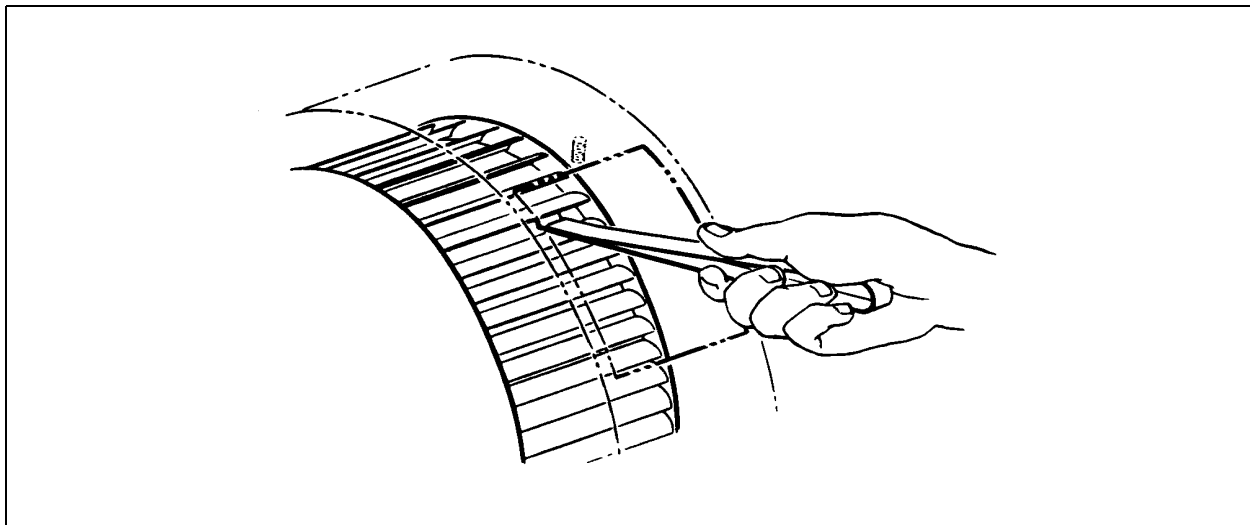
Use of Clayton blower rotor cleaning tool (UH-15252)
